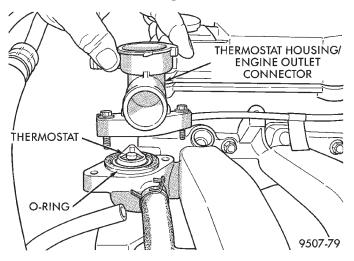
Thermostat and Engine Outlet Connector— 2.4L Engine
